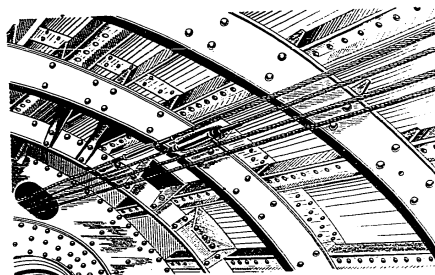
DIRECTIONAL (FOOT) CONTROL SYSTEM CABLES.
